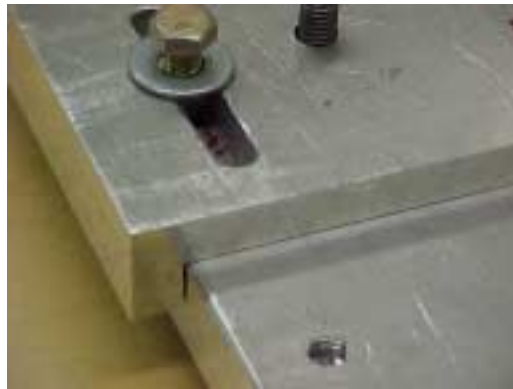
End View of the Slide Showing One of the Guides on the Base.
